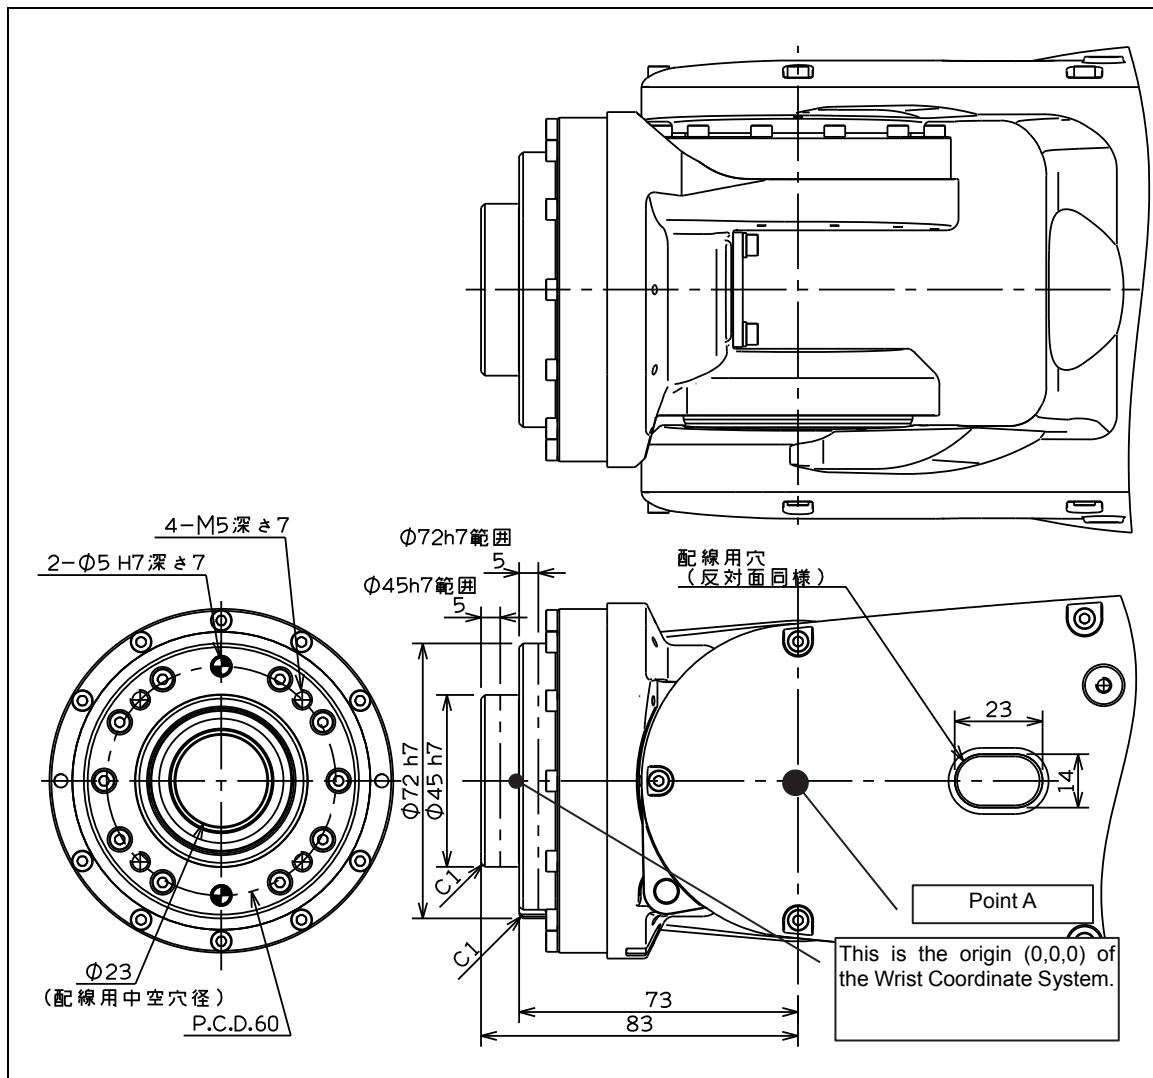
Detailed outline drawings of tool installation area (example of MZ07)
